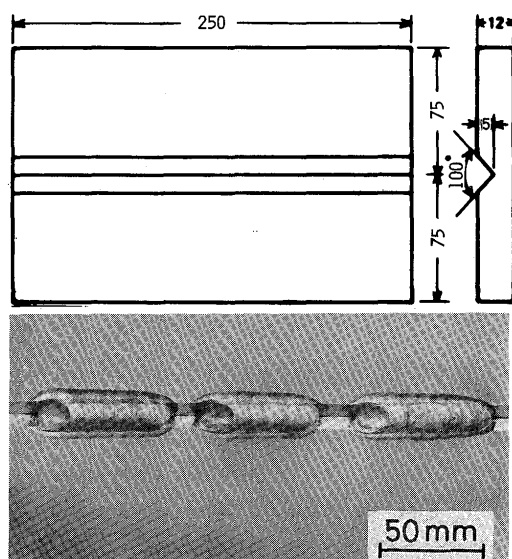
Dimensions and appearance of specimen for GMAW crater cracking test.
